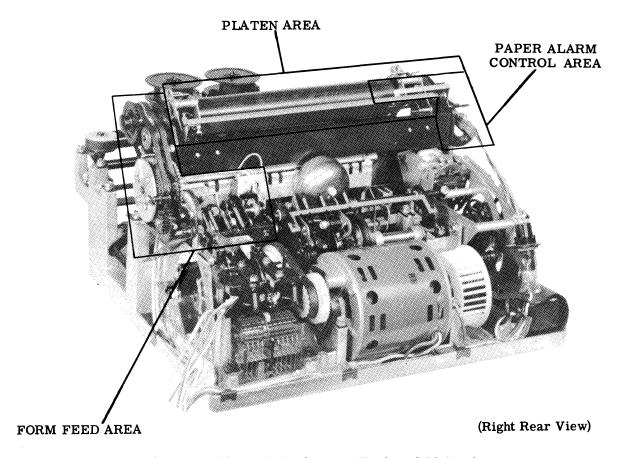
Paper Alarm Control, Form Feed, and Platen Areas
